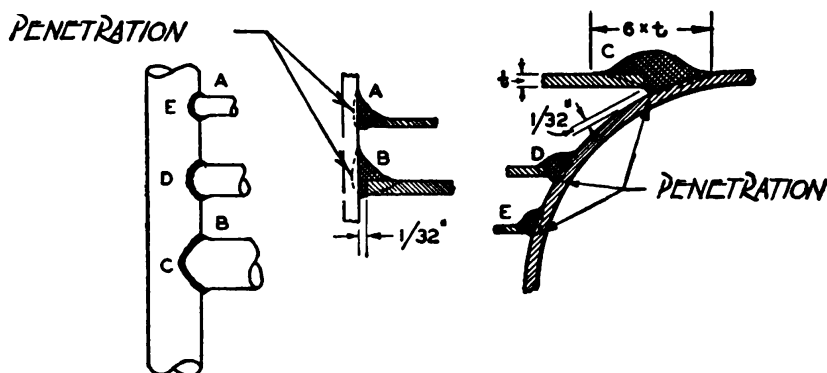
Weld metal specifications for tubular angle joints.
